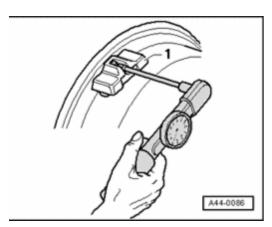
Pressing Wheel Electronics Into Bed And Fasten At Rear Of Valve With Microencapsulated Bolt
